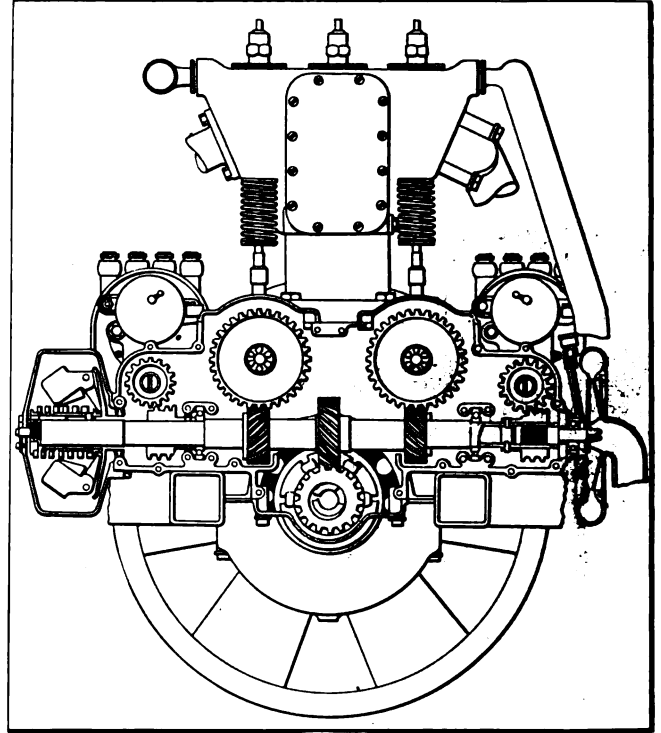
Spiral gear system used on the Moore motor for driving the camshafts and magnetos
